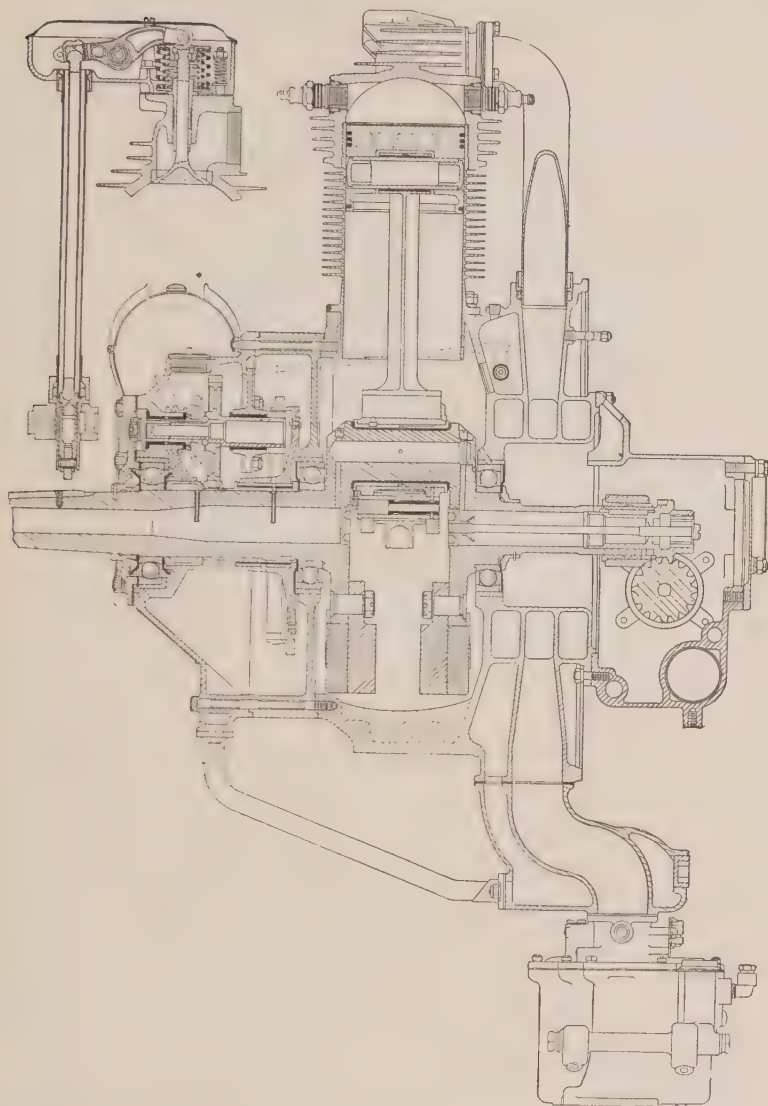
Wright Whirlwind engine, cross-section. (Courtesy Wright Aeronautical Corp.)
